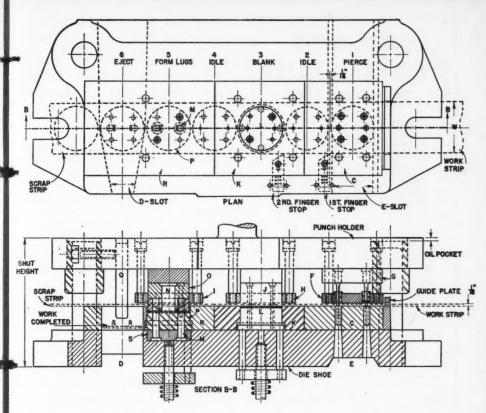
Design of a high-speed six station progressive die for producing 5,000 complete movement plates per hour.
